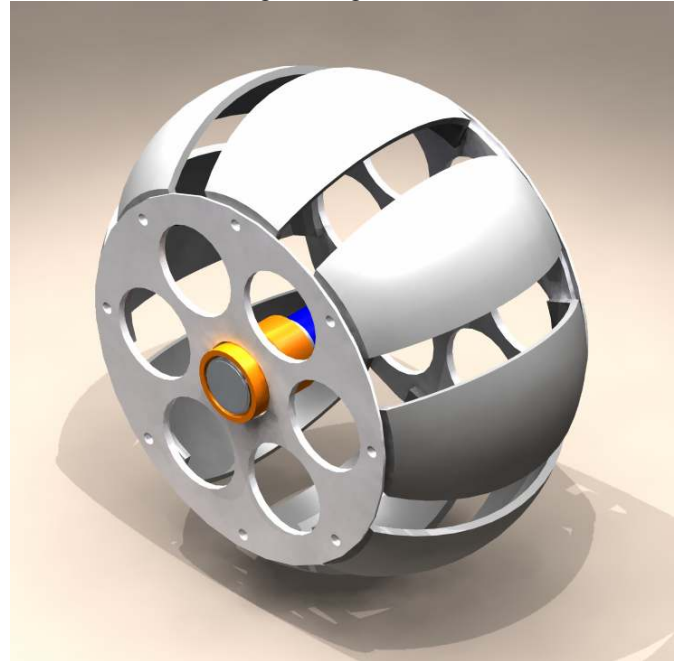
Rendering of the in-wheel motor assembly. The curved tire sections were discarded later since they did not help reduce ground pressure.
